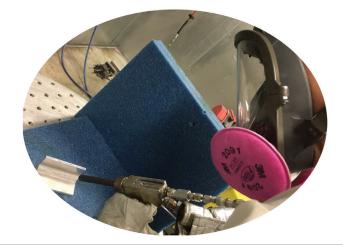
VRC Gen III Cold Spray System being used manually to produce a dissimilar metal joint between AI and Mg.
